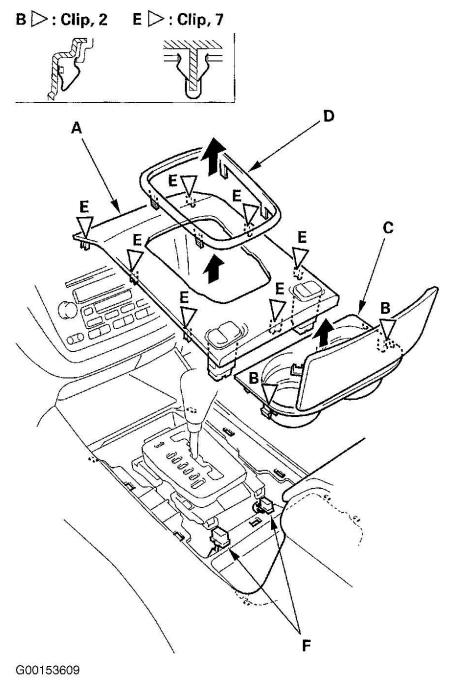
Removing Console Panel Courtesy of AMERICAN HONDA MOTOR CO., INC.
